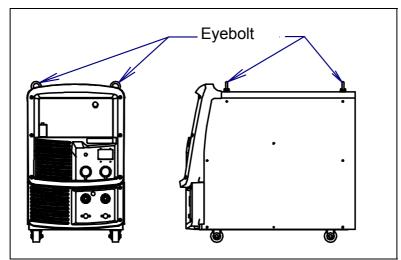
(g) Transportation of welding power supply
